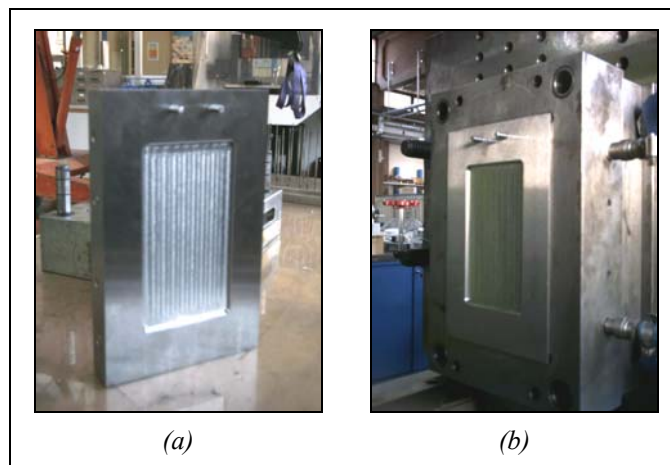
(a) Mobile insert; (b) mobile insert assembled into the mobile half of the mould base.
